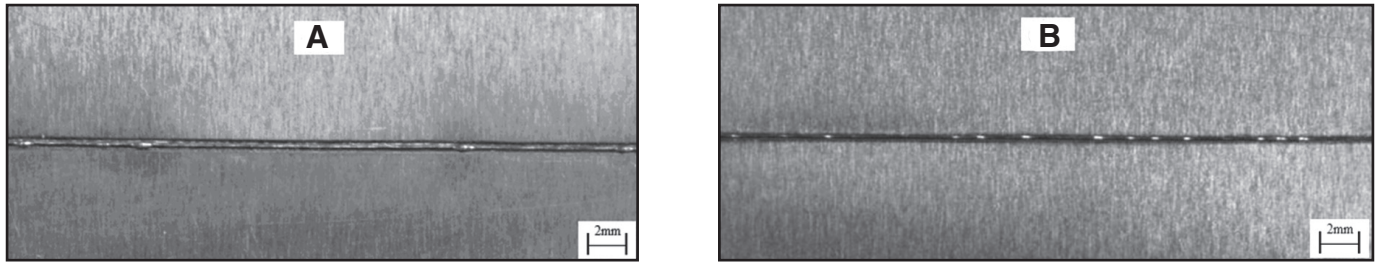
Laser welding surface appearance. A — Front side; B — the back. Laser power density is  $6.97 \times 10^5 \text{ W/cm}^2$ , welding speed is 45 m/min.
